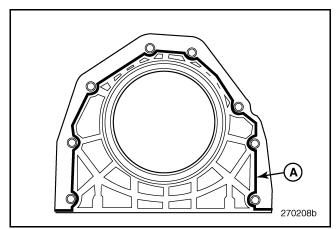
Sealant Application Pattern — Crankshaft Front Seal Cover to Block
